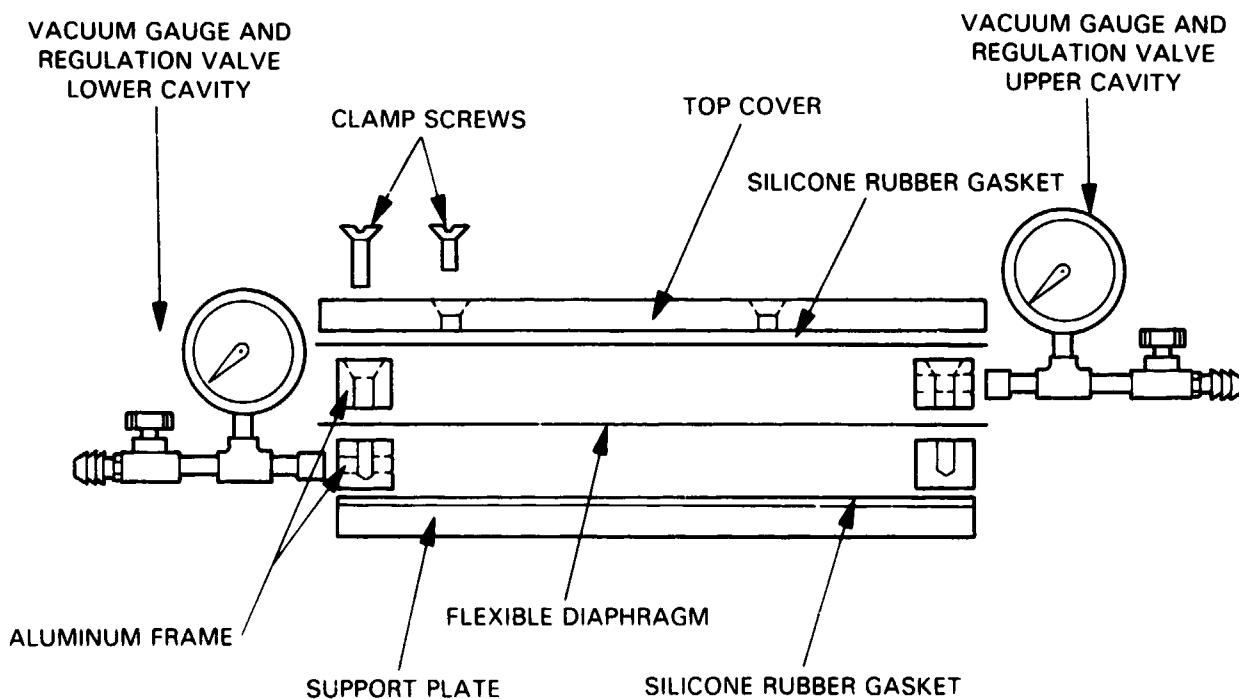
Laboratory-Scale Double Vacuum-Bag Assembly
